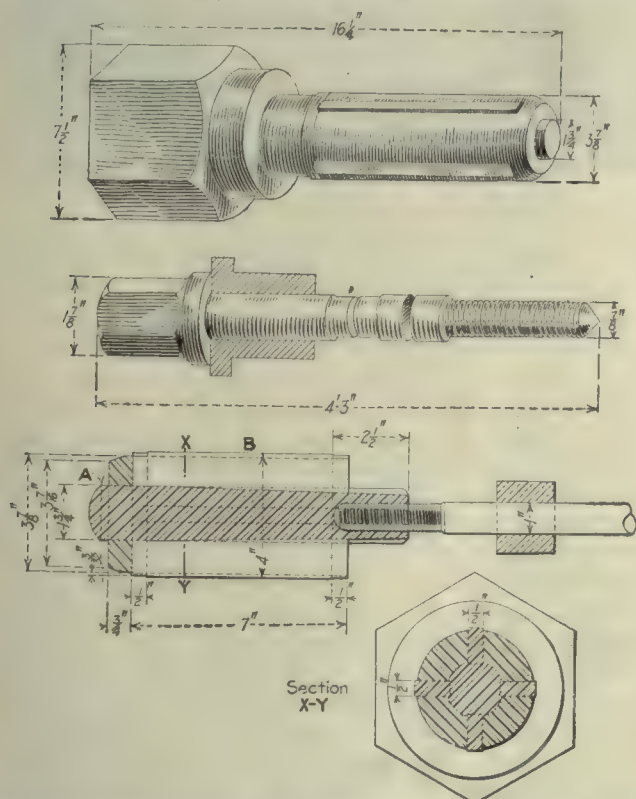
EXPANDING MANDREL FITTED TO LE BLOND ENGINE LATHES FOR FINISH-TURNING, OPERATION 8
